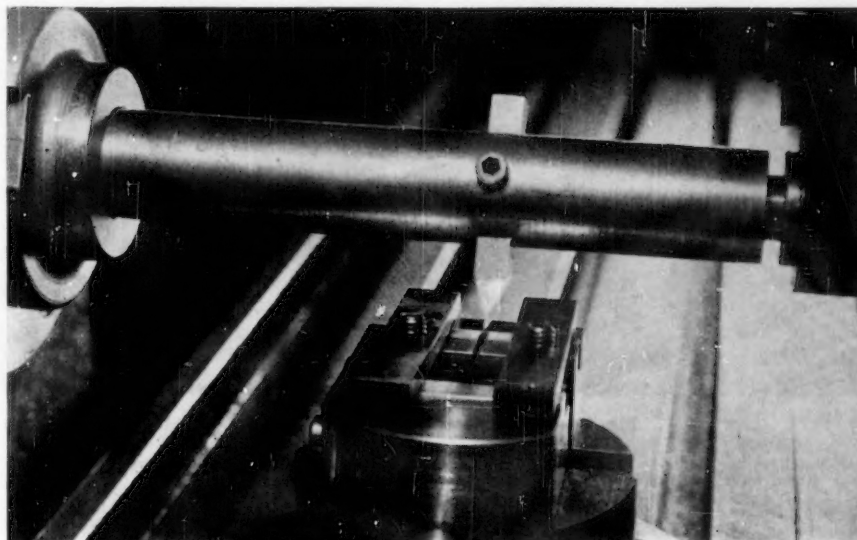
Method of Cutting V-Notch Charpy Bars with Carbide-Tipped Cutter in Milling Machine.
